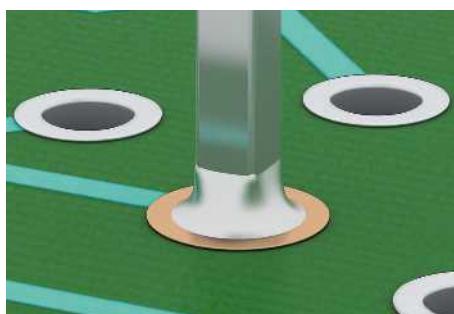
Residual ring coverage on primary side 75%, wetting of the soldering pad is not necessary
